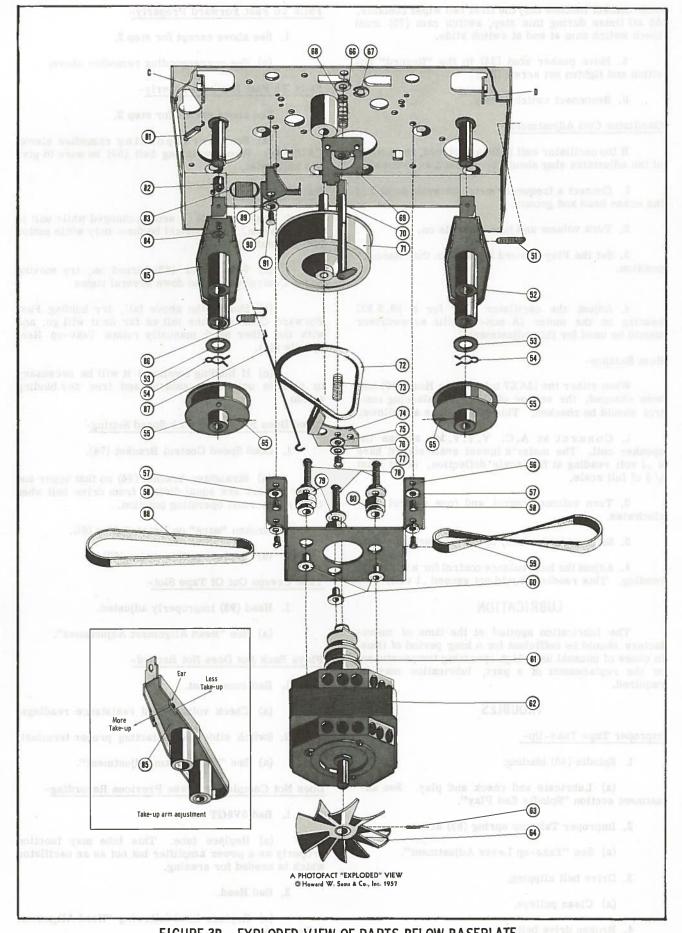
B. EXPLODED VIEW OF PARTS BELOW BASEPLATE.
